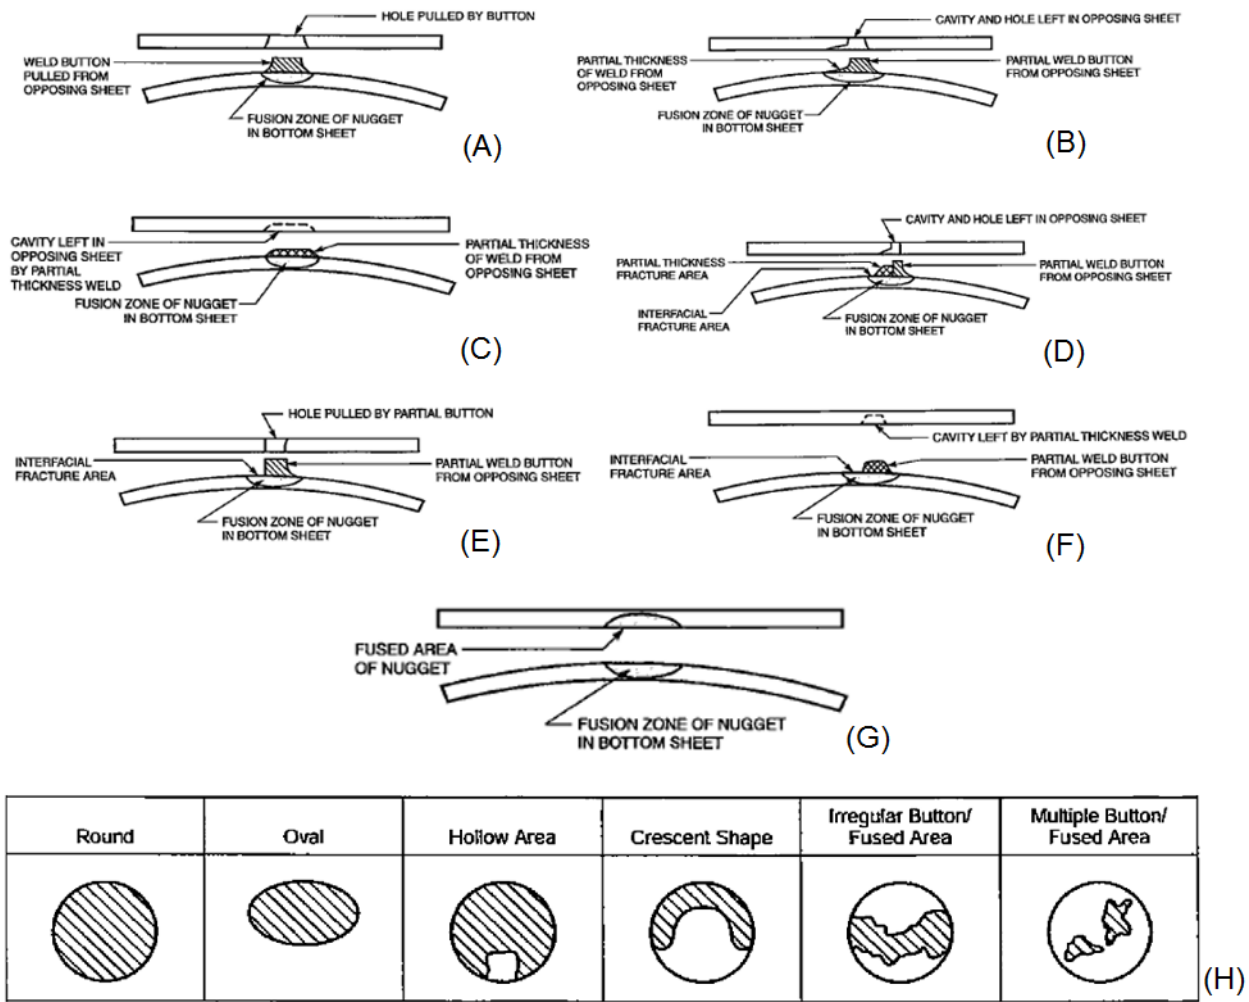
Spot weld failure in (A) Button Pullout (B) Partial Thickness Fracture with Button Pull (C) Partial Thickness Fracture (D) Interfacial Fracture with Button Pullout and Partial Thickness Fracture (E) Interfacial Fracture with Button Pullout (F) Interfacial Fracture with Partial Thickness Fracture (G) Interfacial Fracture (H) Weld fracture in plain view [24]
